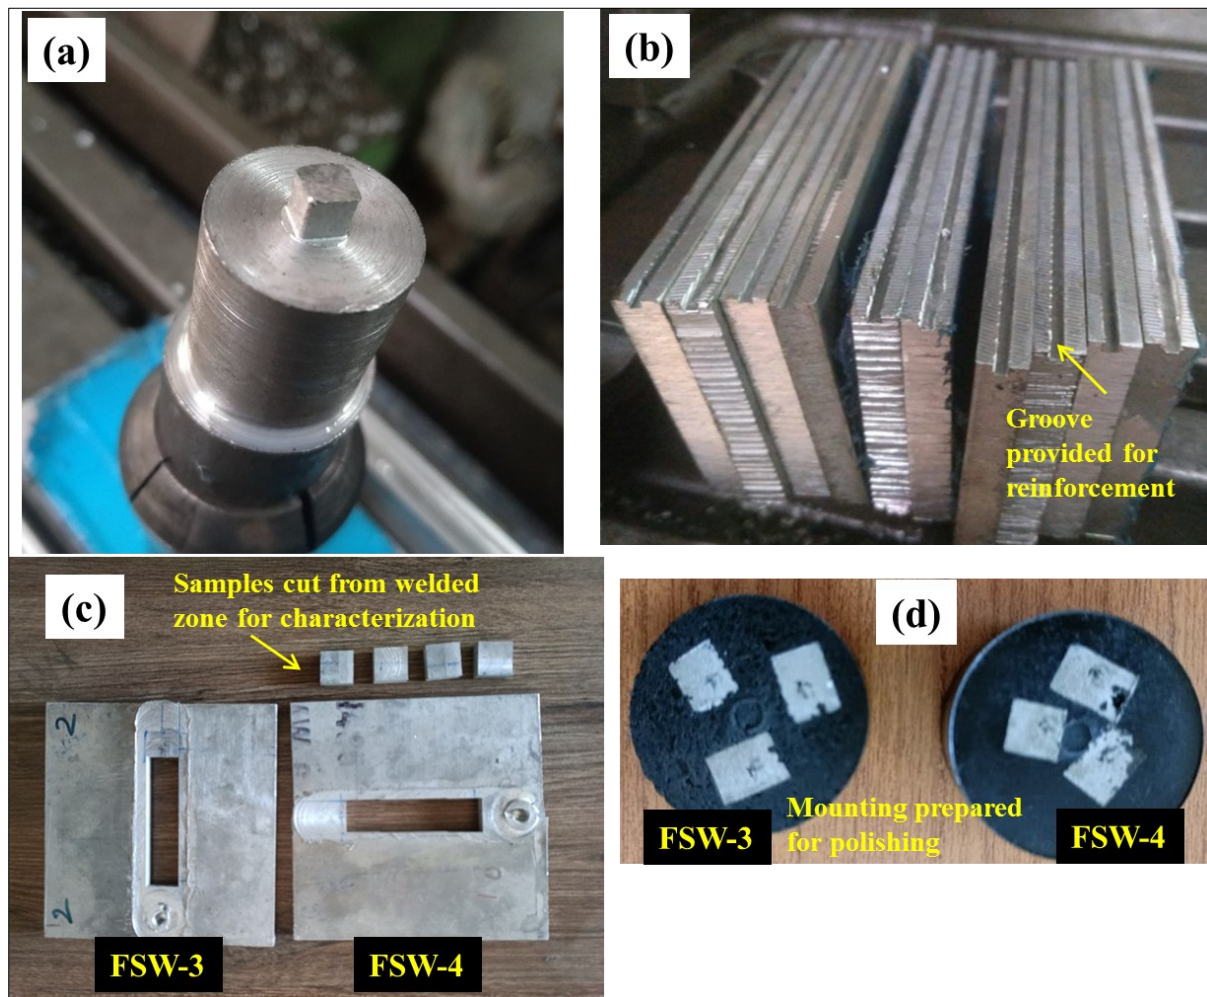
FS welding components (a) FSW tool with square pin, (b) Aluminium plates made with grooves to retain reinforcement (c) FS Welded plates cut to extract the samples (d) Samples fixed in mount for characterization.
